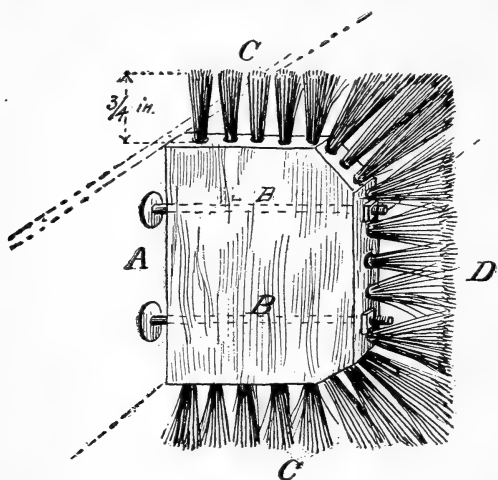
Elevator and belt brush for cleaning elevators infested by the Mediterranean flour moth. It is made by taking a piece of $1\frac{1}{2}$ -inch board of same dimensions as elevator cups, fastening bristles to three sides. Side A is fastened to elevator belt with flat-headed bolts running through board, as shown at BB, the bolts being $\frac{1}{4}$ or $\frac{3}{8}$ inch. Bristles on sides CC should be $\frac{3}{4}$ -inch long, but those at D should be longer, so that a good brushing to outside of elevator may be secured. Such a brush can be made to fit any elevator. (Chittenden.)
